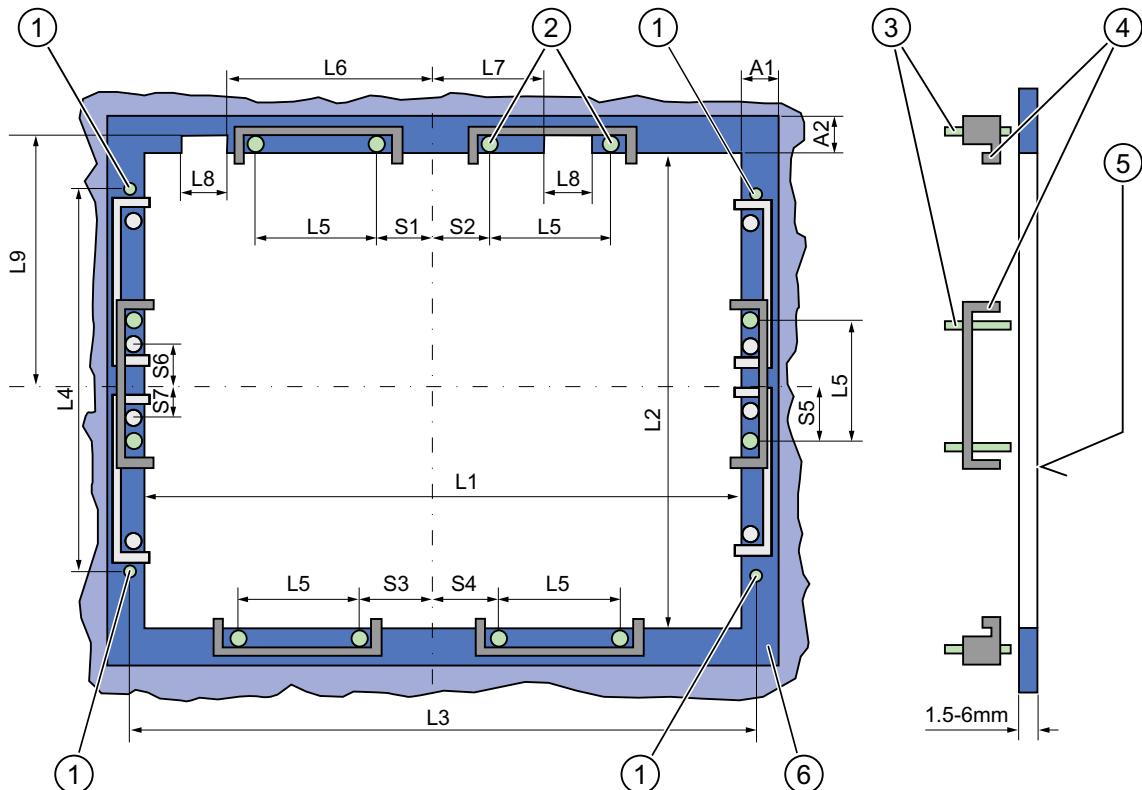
Drill holes for the screws and pressure points for the clamp screws
